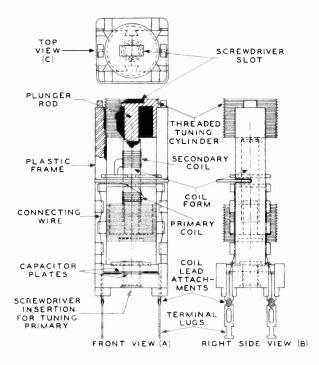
Detailed assembly drawing of the K-Tran transformer: front view (A), right side view (B), and top view (C).
